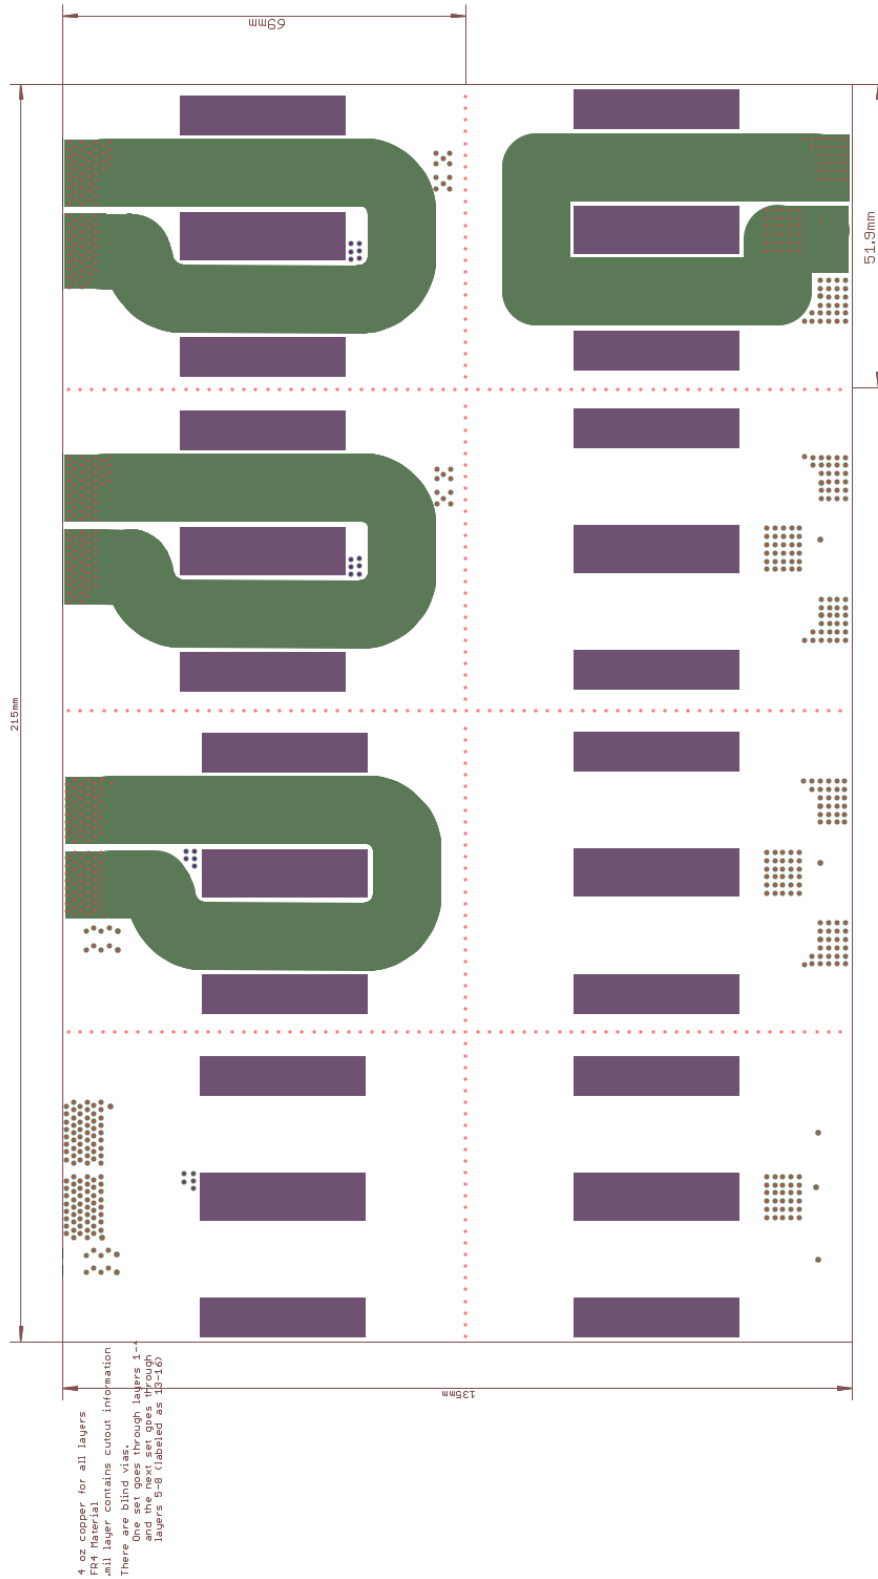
Layer 4 of the ICN transformer PCB winding (located in the top left) and other magnetic component variants. The purple rectangles indicate cutouts in the board.
